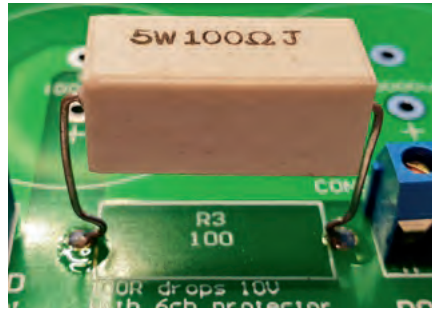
space the wirewound resistors off the PCB to help with heat. bridge rectifier and filter PCB. Its circuit is shown in Fig.21.
